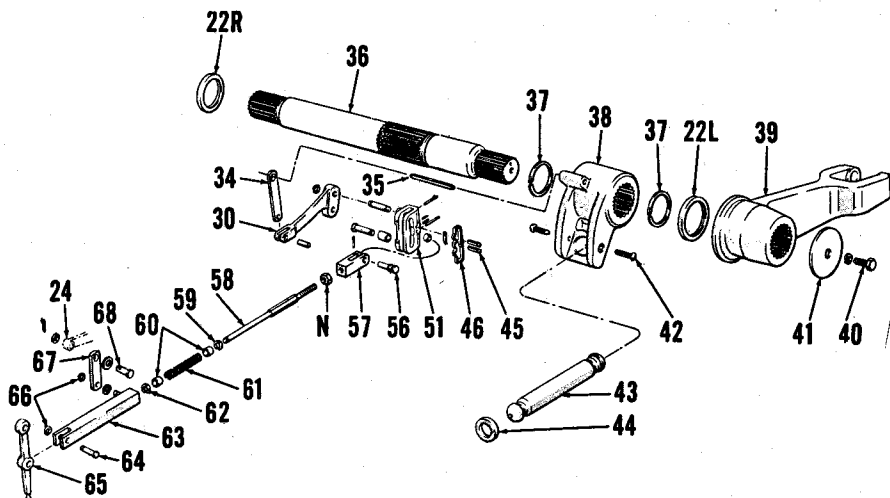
Exploded view showing lift shaft and control linkage as removed from lift cover. Refer also to Fig. 223 for exploded view of selector detent mechanism and to Fig. 224 for adjustment of control valve actuator link. Bumper ring (44) on piston rod (43) prevents rod from striking cylinder if lift arms are raised with piston in forward (lowered) position.
